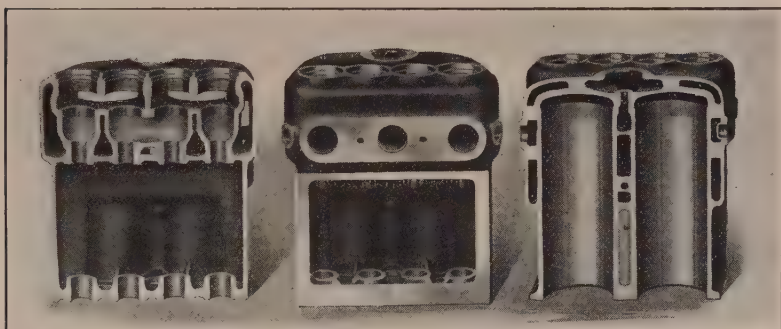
Mitchell. L-head cylinder casting showing spacing of valves and water jacket.
